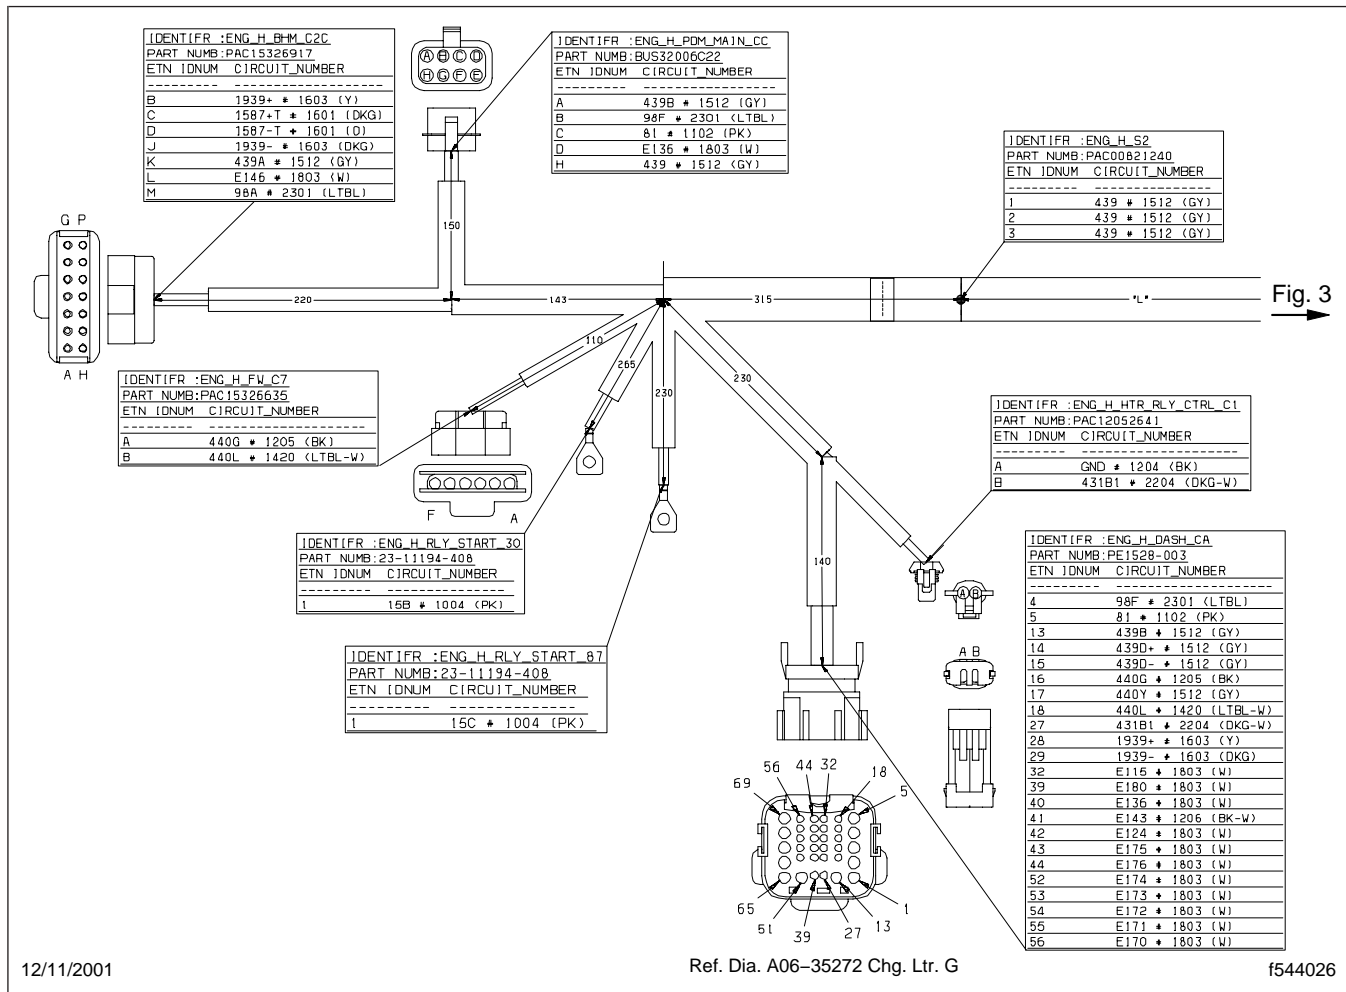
, MBE900 Engine Harness, Automatic Transmission (detailed view, bulkhead connector end)
